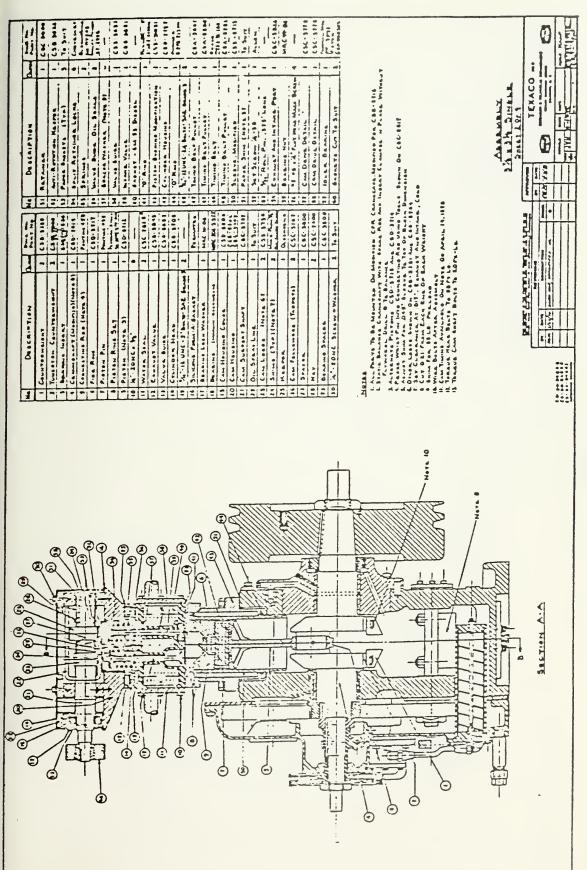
SINGLE CYLINDER ENGINE ASSEMBLY
